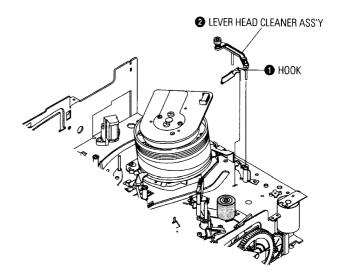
Lever Head Cleaner Ass'y Removal
